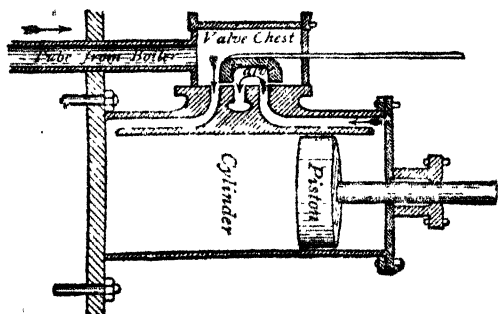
Another picture of the cylinder of a steam-engine. The steam rushes from the boiler into the *valve-chest* and through the open way into the cylinder and pushes the piston to the right (in the picture). Then the steam is let into the cylinder by another way and pushes the piston to the left (in the picture). The piston-rod keeps moving to and fro. It is fastened to the driving-wheels by a crank, and the wheels keep moving round and round, and the locomotive keeps moving along, dragging the train after itself.
